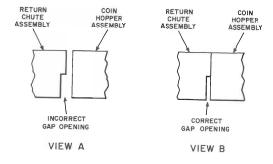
Relative Position of Return Chute Assembly and Coin Hopper Assembly As Viewed Down Hopper Throat
